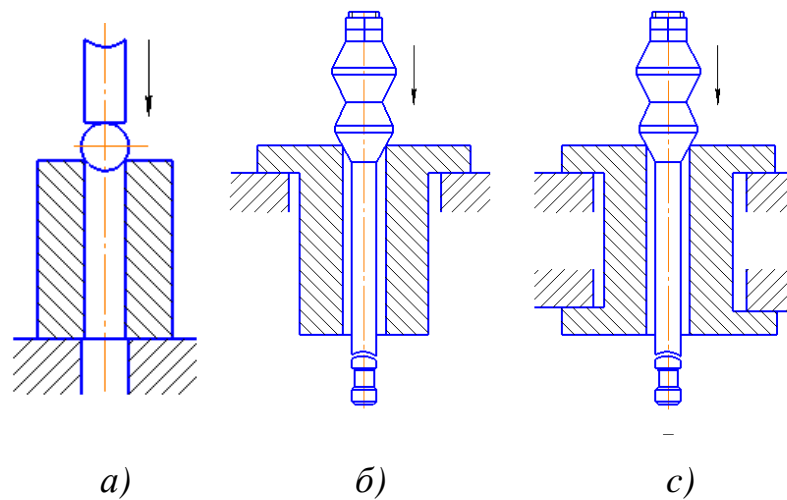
Scheme of bores burnishing: a - the ball (with the compression of the details); b - multi-tooth burnishing tool-broaching (with extension of the detail); c - multi-tooth burnishing tool -broaching (with axial predeformation of the detail).
